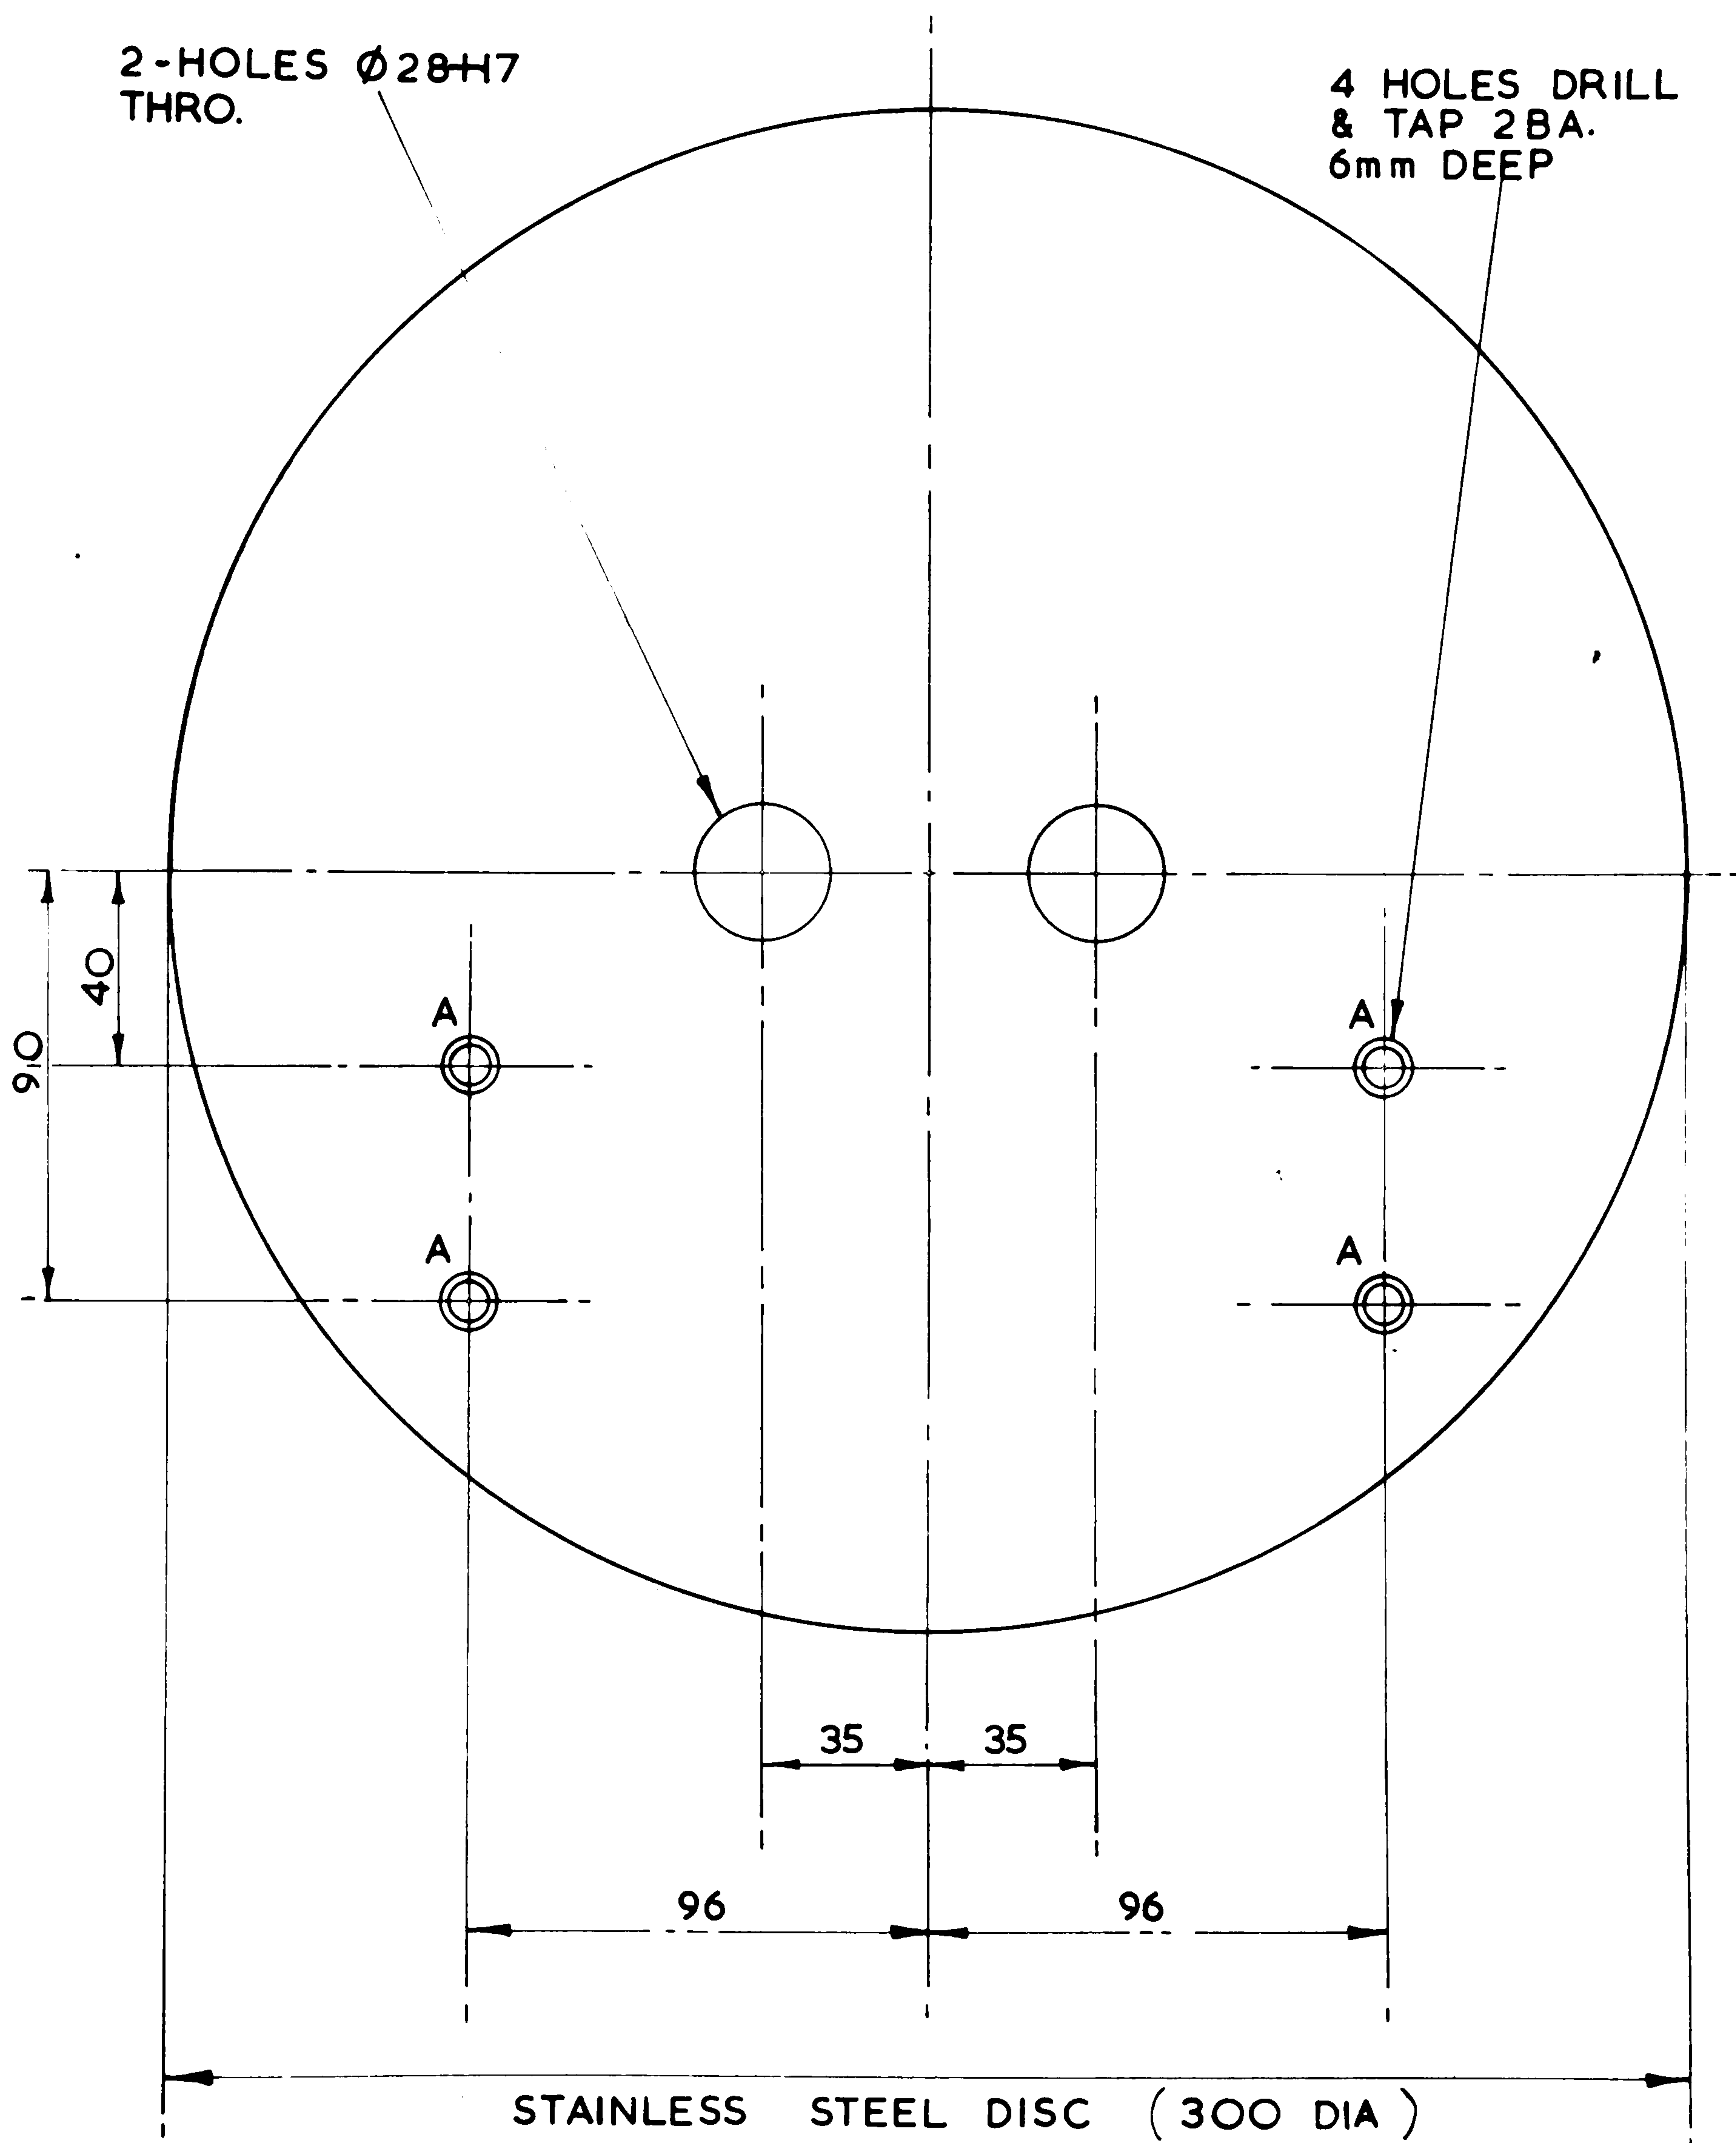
R.F. sputtering chamber top disc-plate (houses copper electrodes) see FIG. A1.6 for assembly. Dimensions in mm
